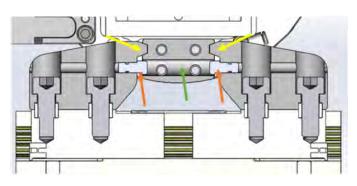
M20 EOAT gripper finger wedge and backup pin cross-section.
